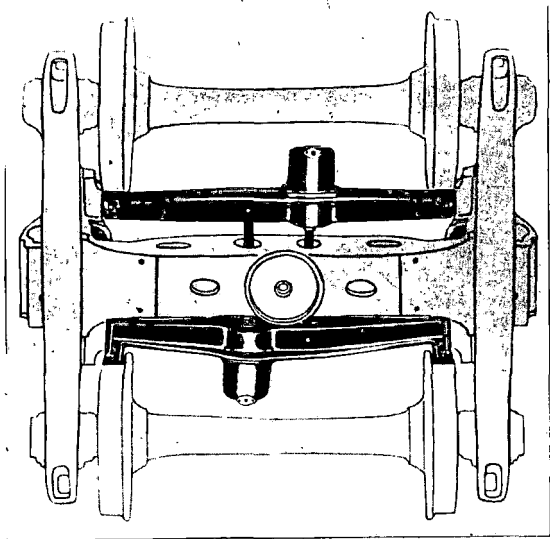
TRUCK MOUNTED BRAKE ASSEMBLIES [3]
